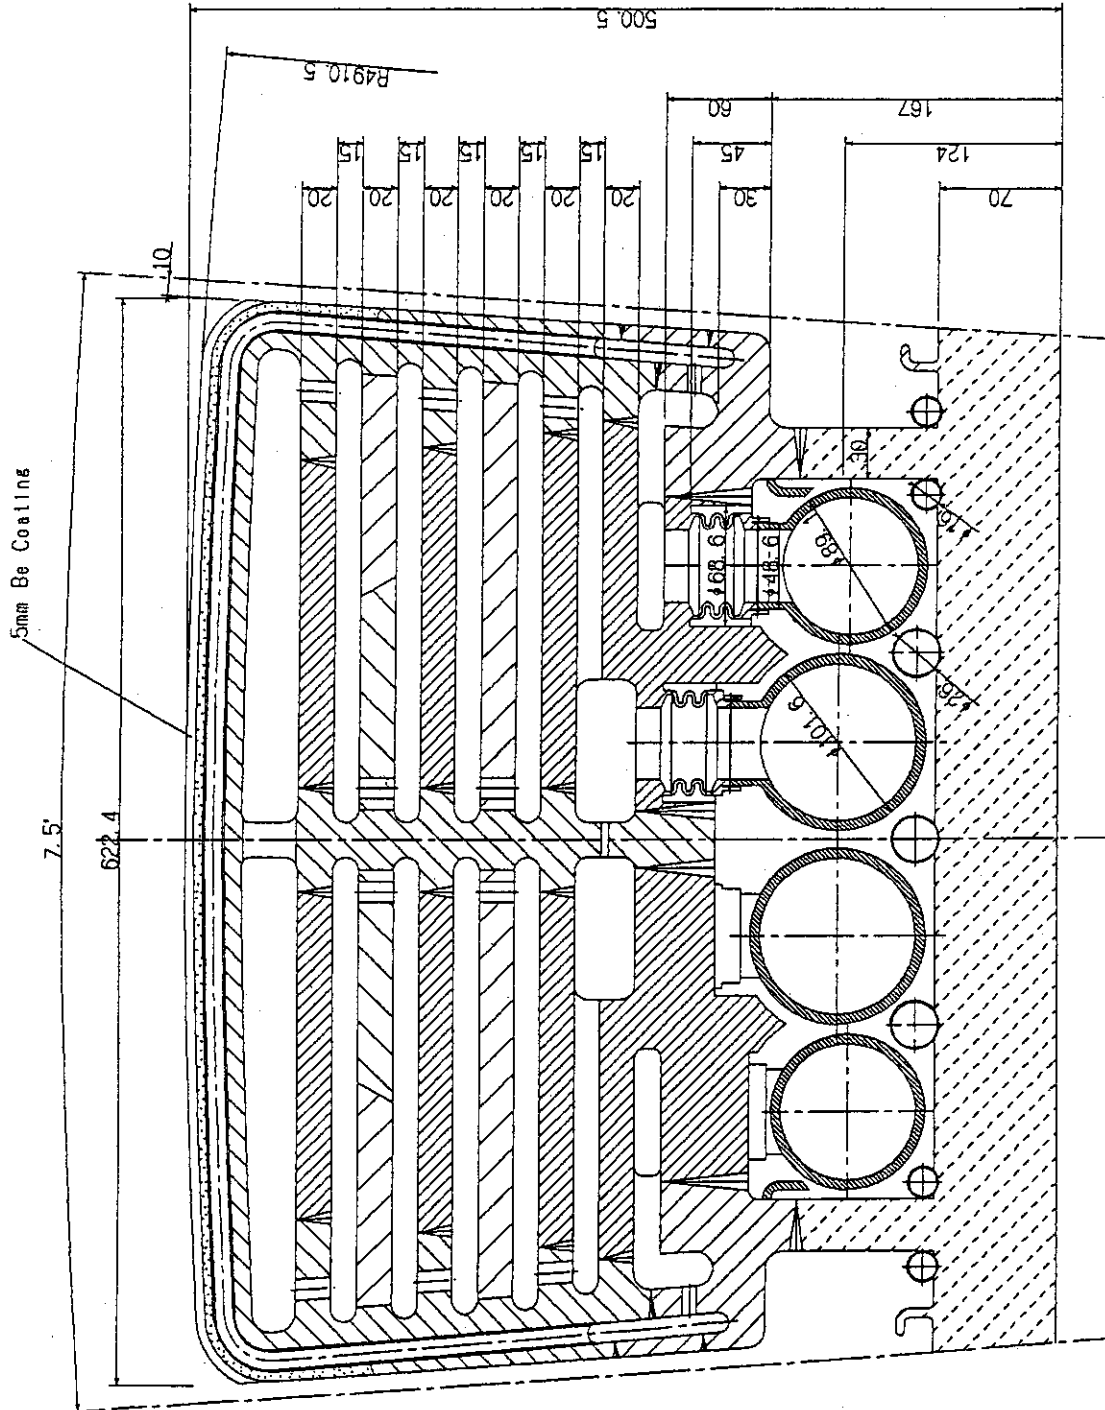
6 A cross sectional view of the blanket module. The blanket module is welded to the back plate by two legs. Four coolant manifolds are located between the back plate and the blanket module.
